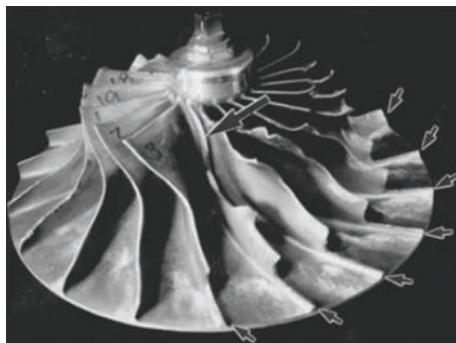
Failed compressor rotor. Arrows indicate fractured portions of blades. Original magnification: 36×
